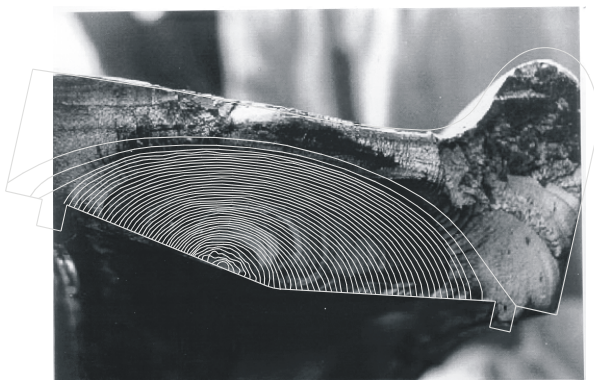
Comparison of simulated crack front with the real fracture surface of the wheel tyre
